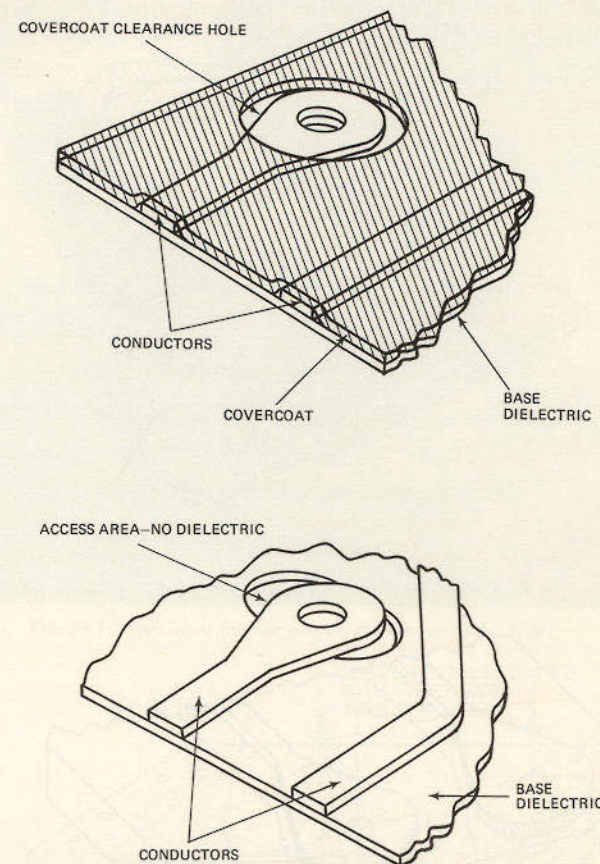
Class Ic double-access uncovered flexible printed wiring.
